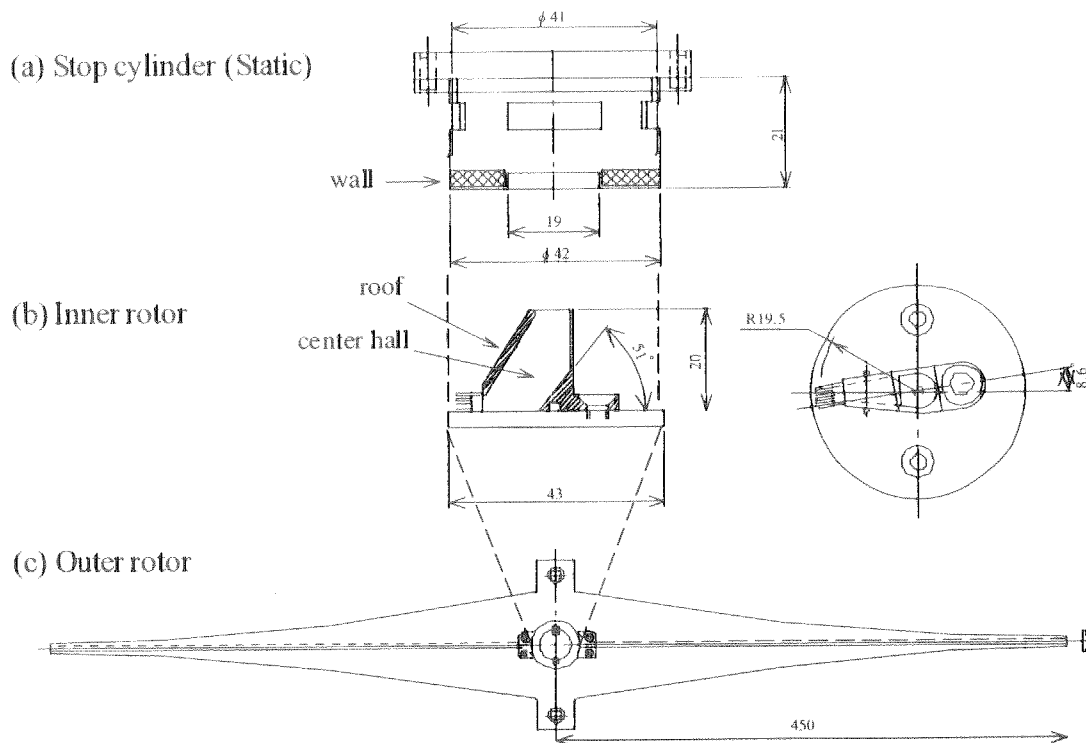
Components of acceleration rod. (a) The stop cylinder, (b) the inner rotor and (c) the outer rotor.
